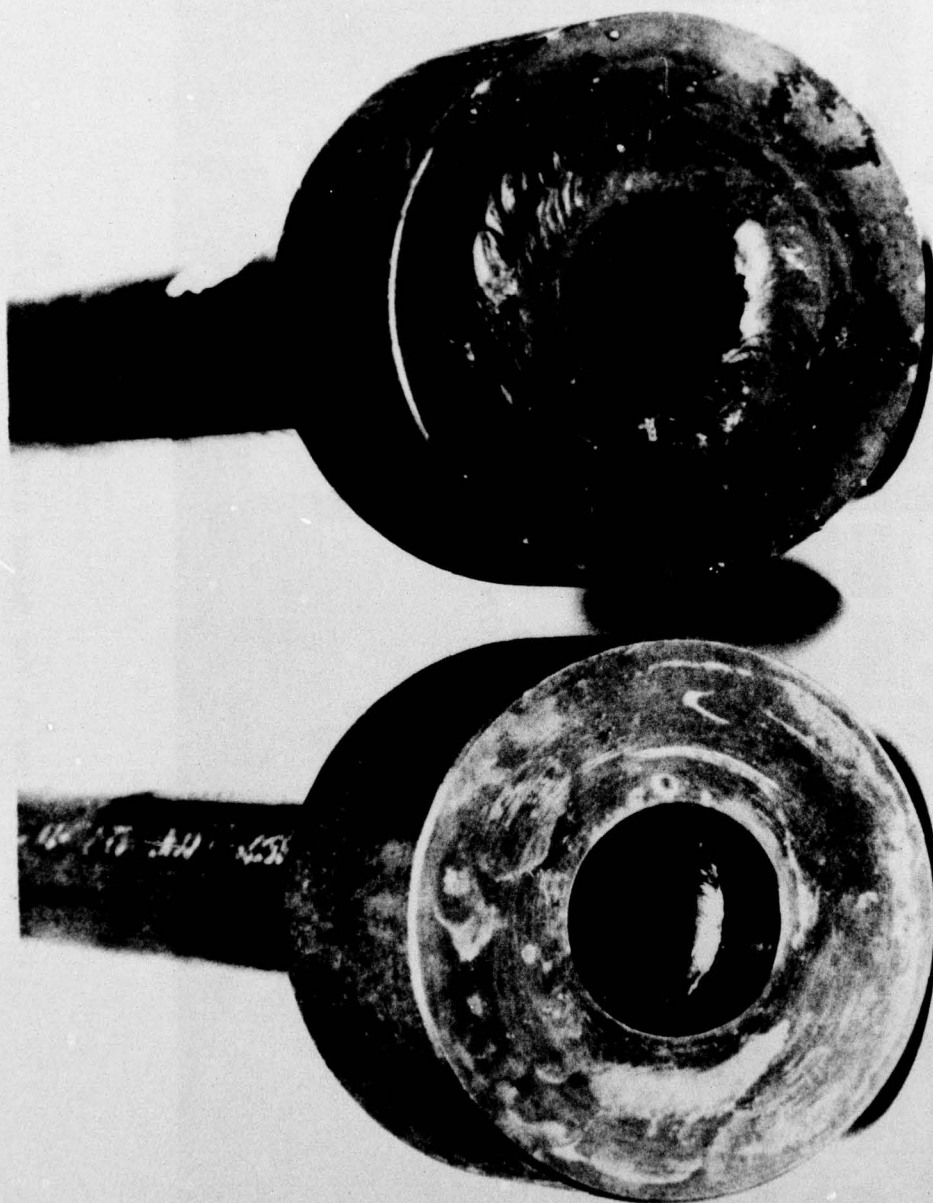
Profile of Test Specimens: Auto-TIG (Specimen M)
